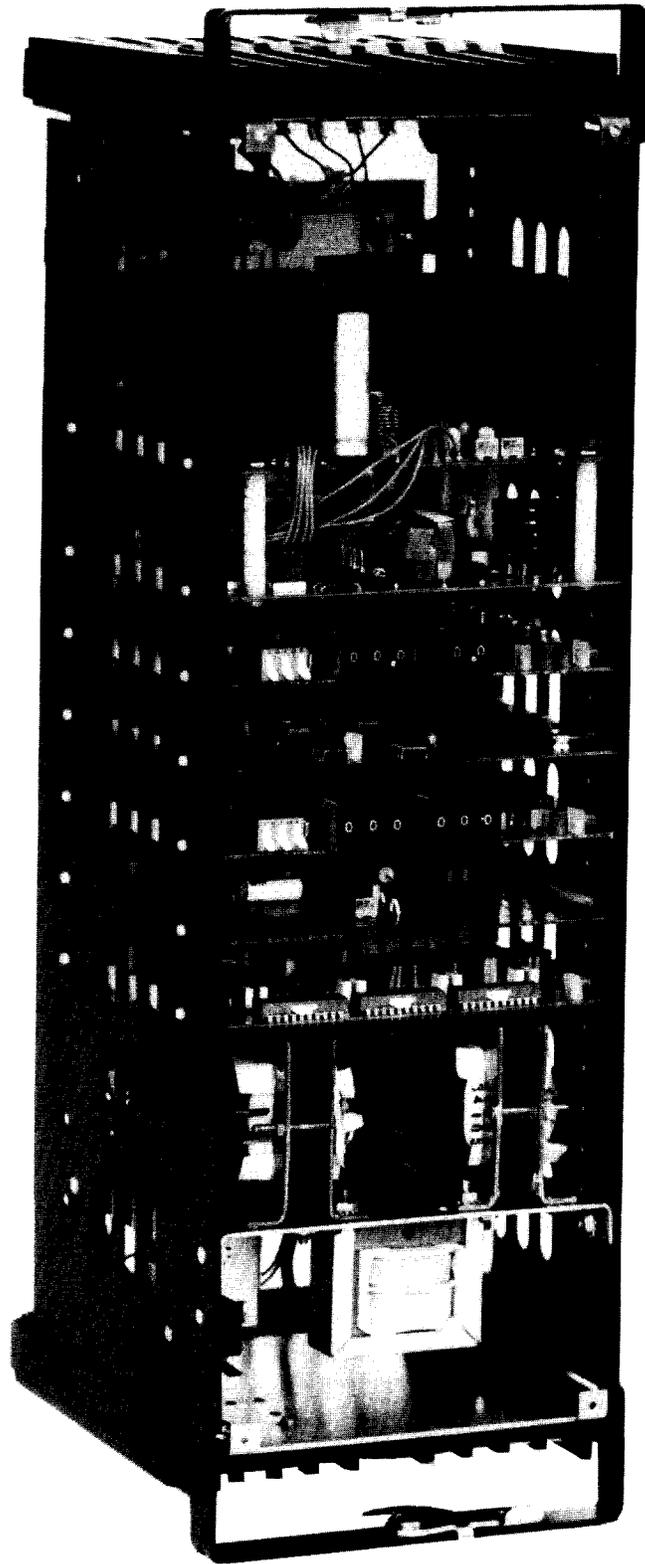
(8919483) View of Cradle Assembly with Nameplate Removed
